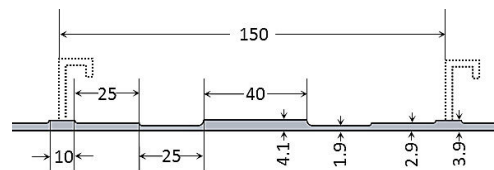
Geometries of a crenellated sheet with welded stringers (unit: mm).
